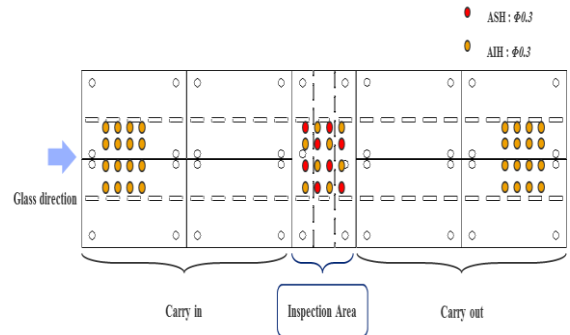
Designed and manufactured inspection system with air pad
